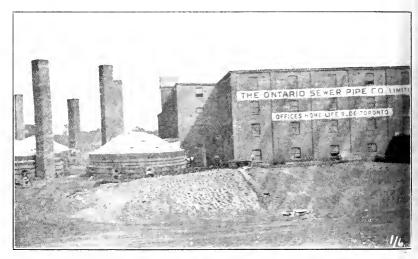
Ontario Sewer Pipe Co's plant, Mimico, showing down-draft kilns used for sewer pipe.
